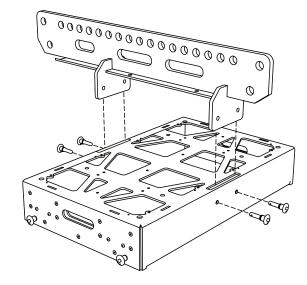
MG-PANTHER Grid Kit, MG-PANTHER Shackle Bar, Exploded View
